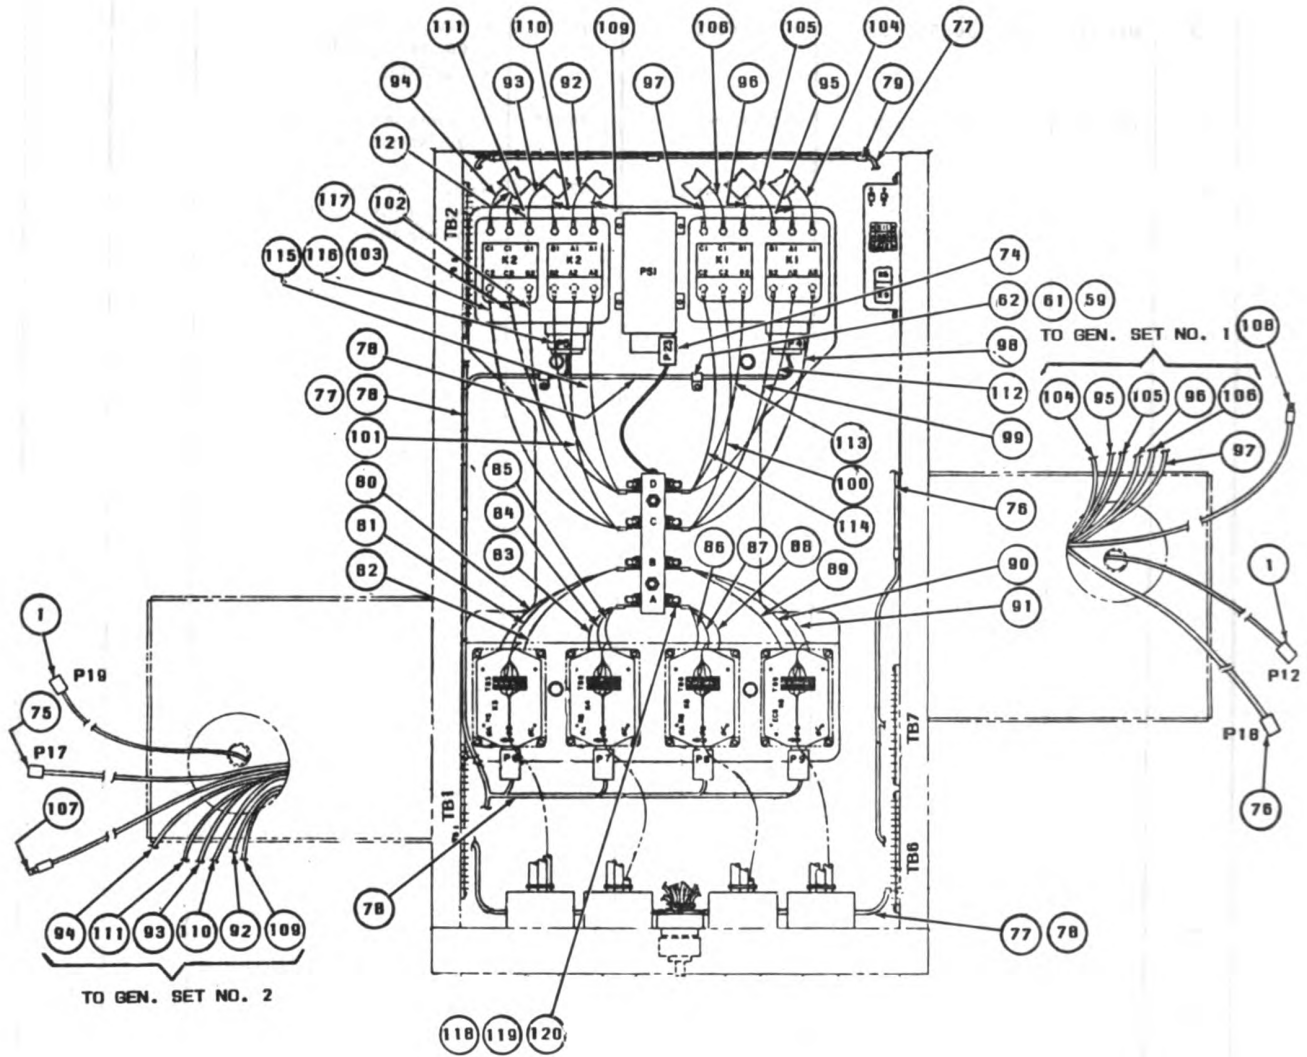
WIRING HARNESSES AND CABLES(SHEET 10 OF 10)
